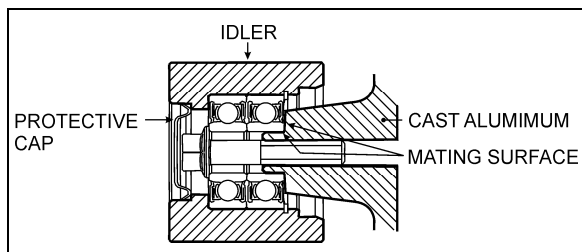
TIGHTENING SPECIFICATION (VOLVO D13 ENGINE)
